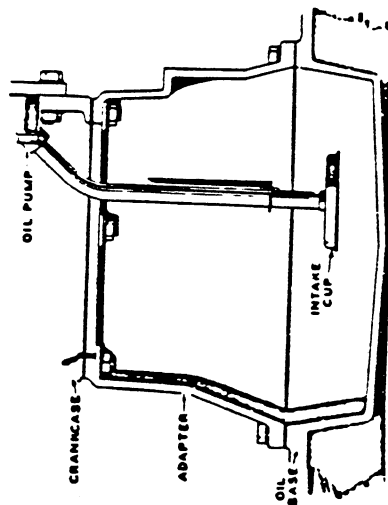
OIL INTAKE CUP LOCATION IN THE ADAPTER
